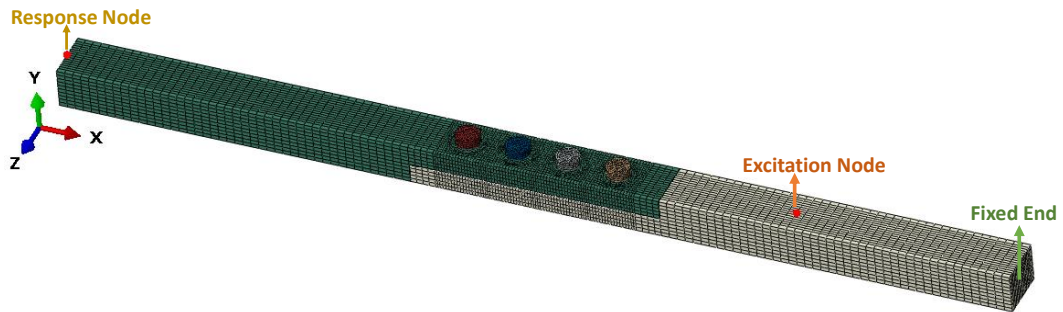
Finite Element Model of 4-Bolted Assembly
